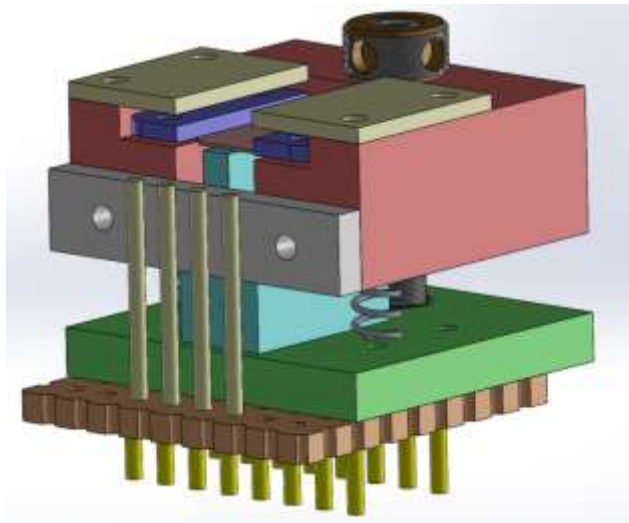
Strain Jig – miniature version for wire bonding – designed for cryostats.
